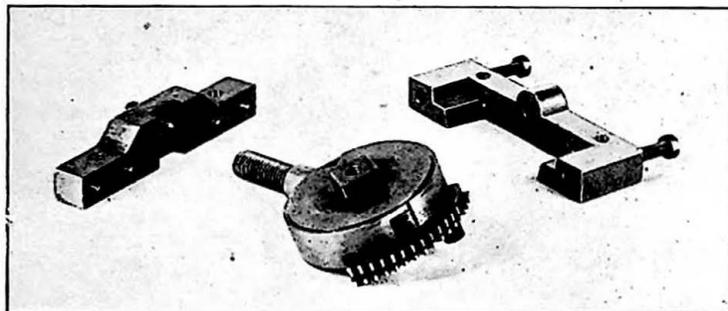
COMPONENT PARTS OF HANDLE UNIT.
